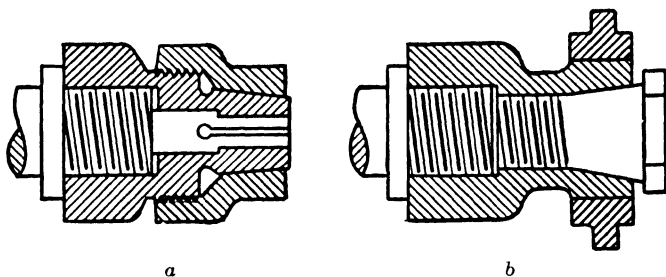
Two special chucks. The collet chuck on the left screws on a lathe spindle nose. The one on the right expands to hold hollow work for turning.
